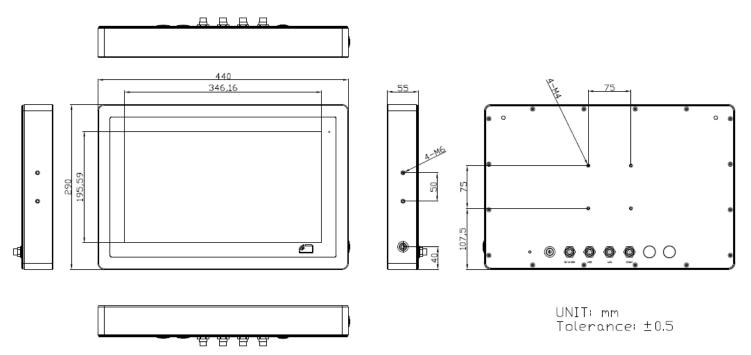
Dimensions of ViTAM-916P/R/G(H)
